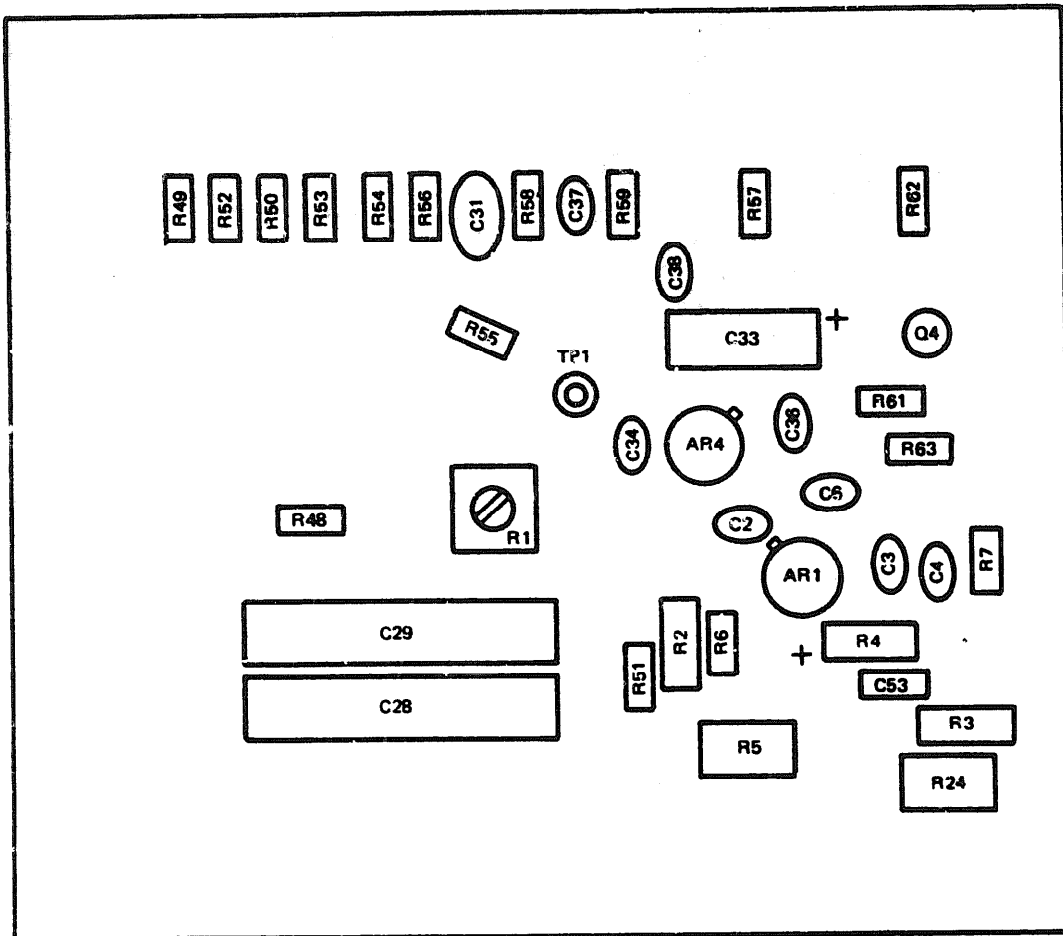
DC amplifier assembly HTA-3A9A1, parts location
